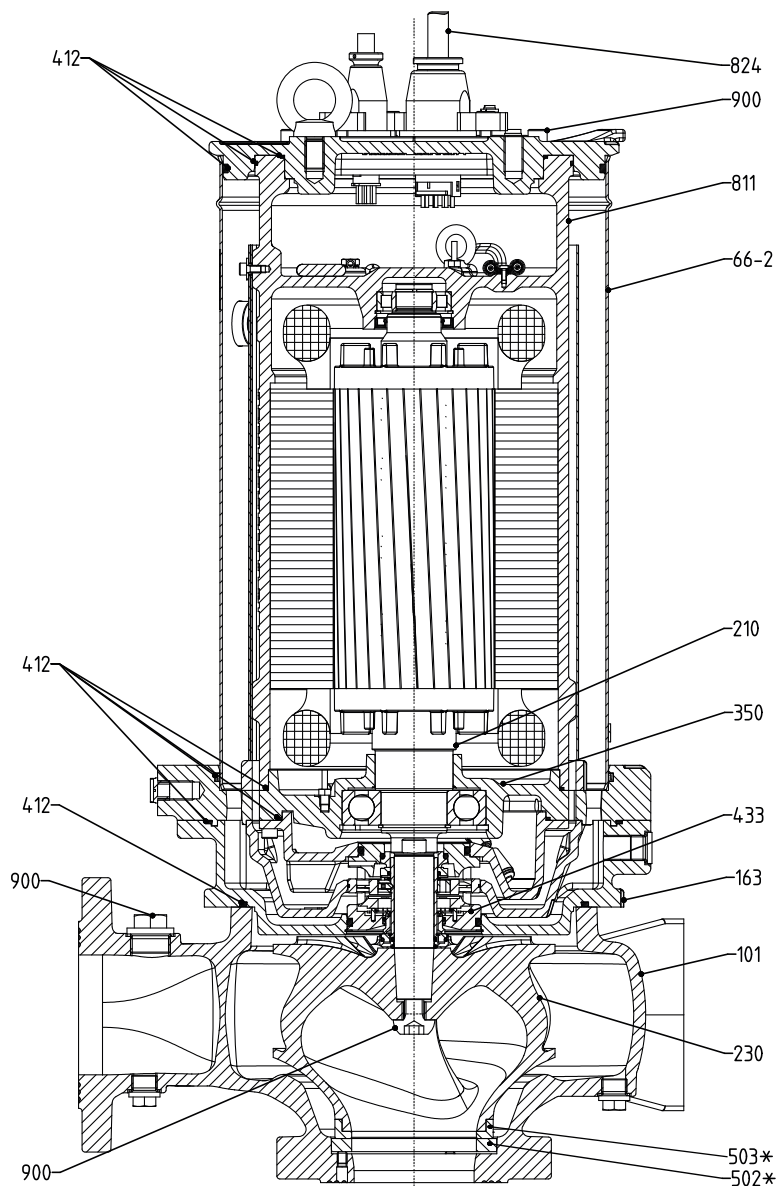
General assembly drawing, example: Amarex KRT K 100-253 / 22 4 UFG-K with cooling jacket
